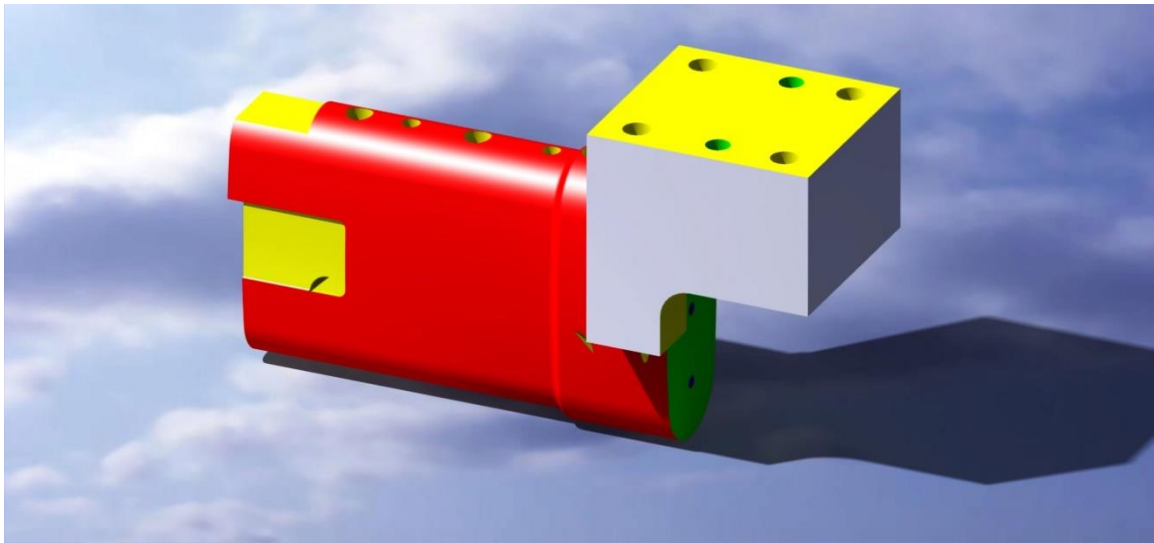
Surface to be Profile Milled (Edges of red colored part)
